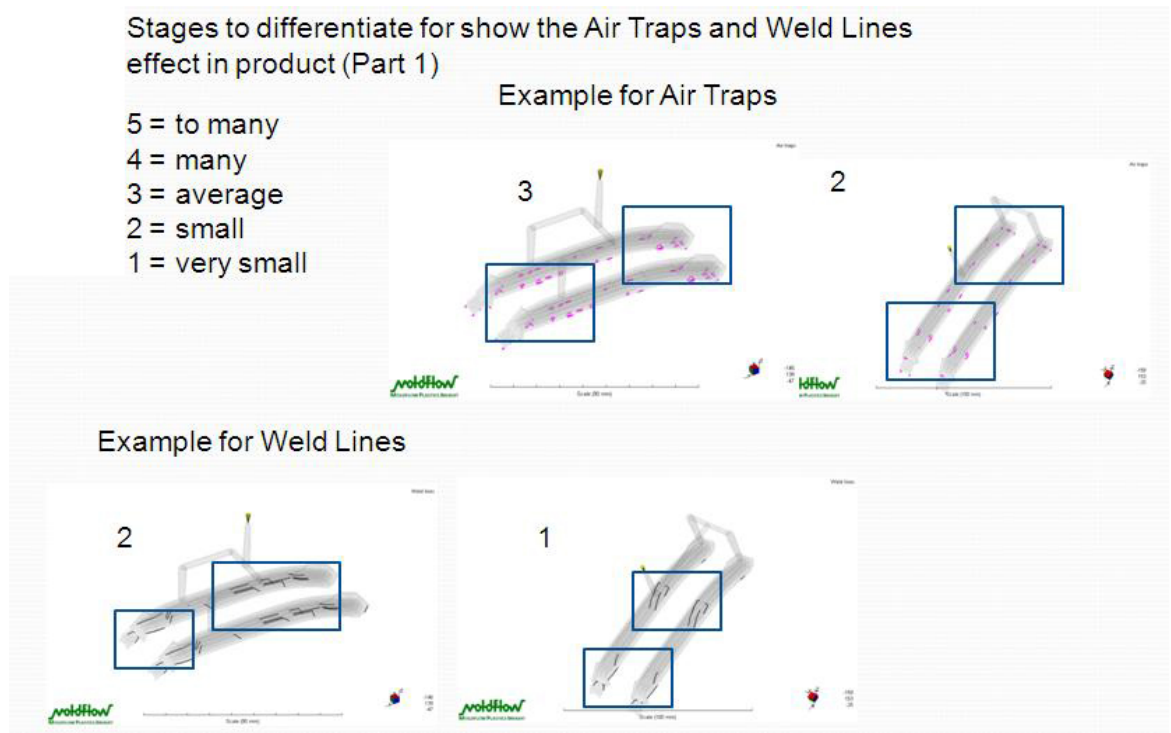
Air Traps and Weld Lines Stage for Part 1
